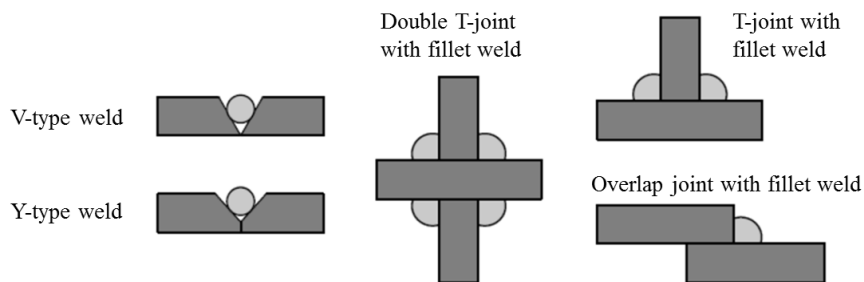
Welding geometries for TTW welding using a transmissive welding aid material
